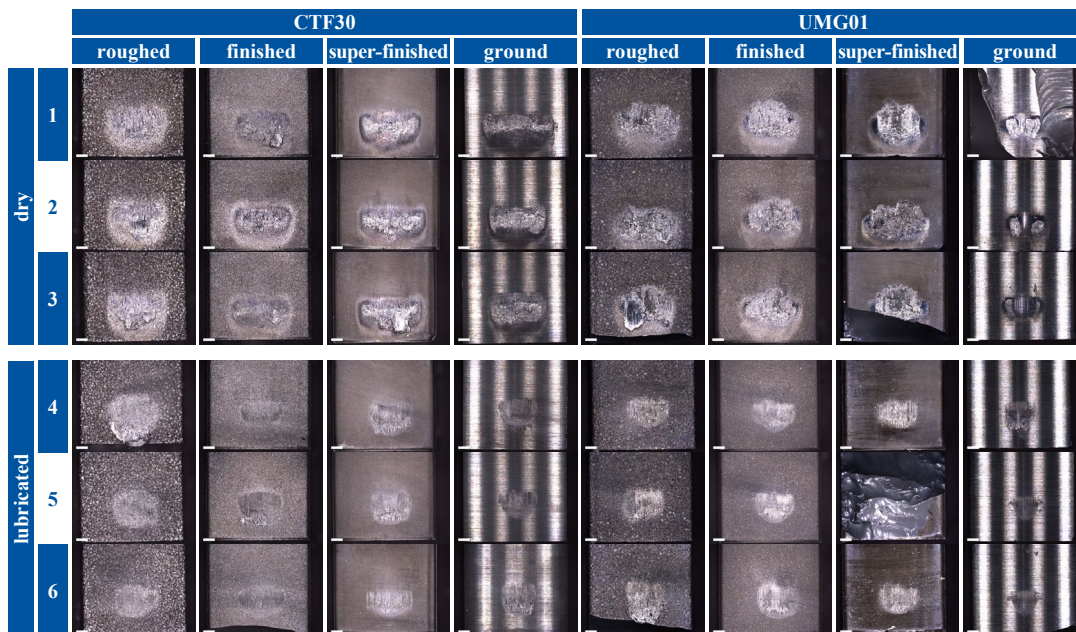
Microscopic images of the surfaces of all pins tested on 42CrMo4.
